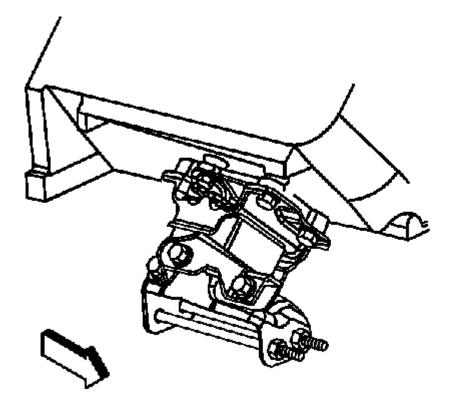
Inspecting Engine Mount Courtesy of GENERAL MOTORS CORP.
